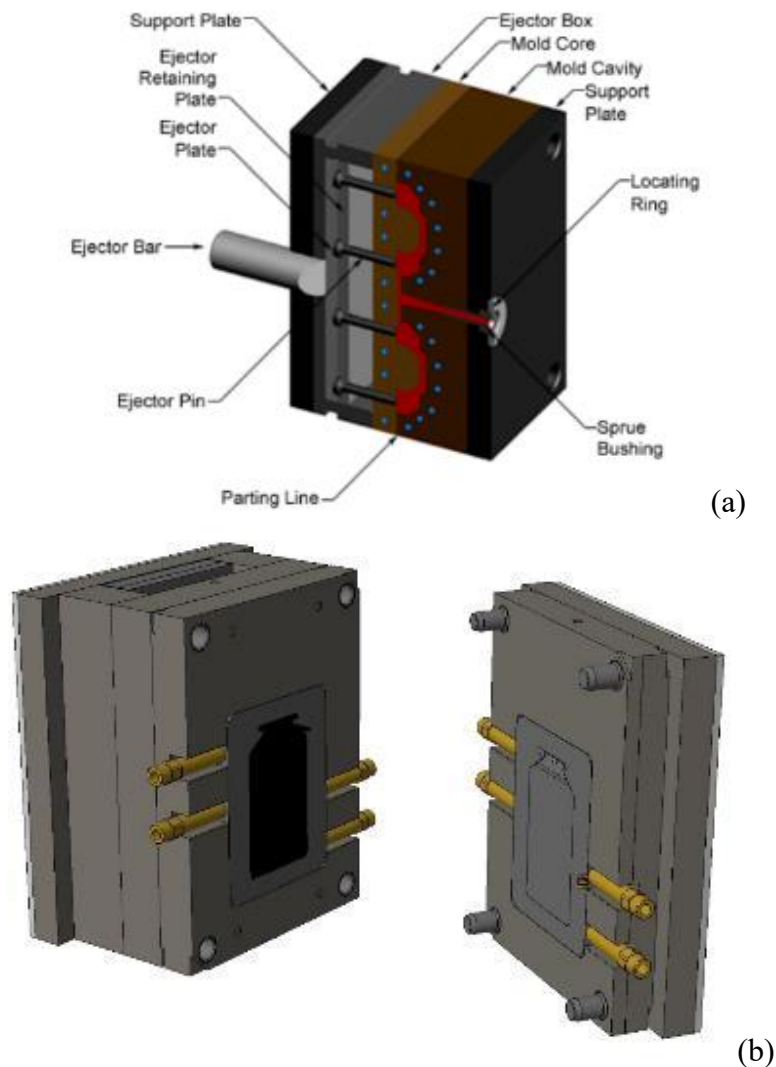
Schematic cross-section of a close (a) and open mould (b).
